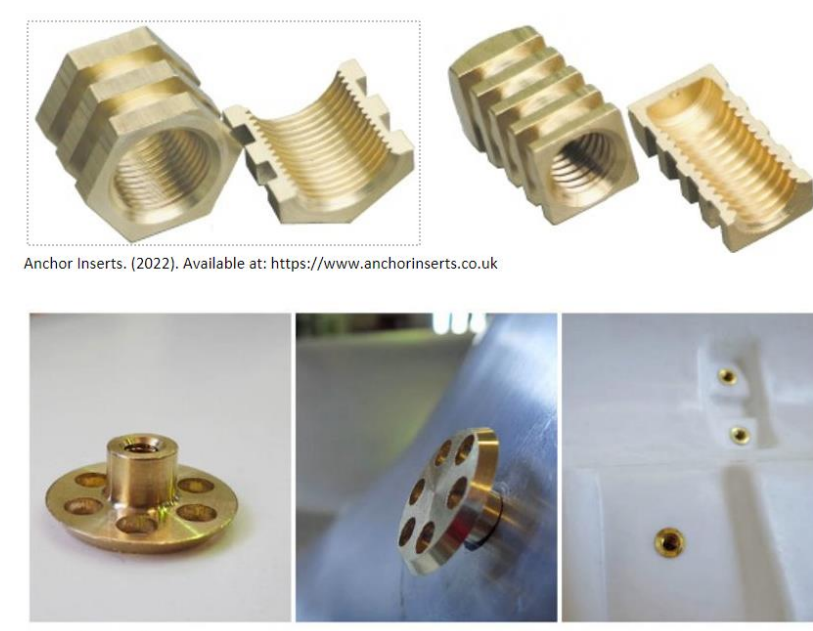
Examples of Mould-in Inserts Used in the Rotational Moulding Industry
